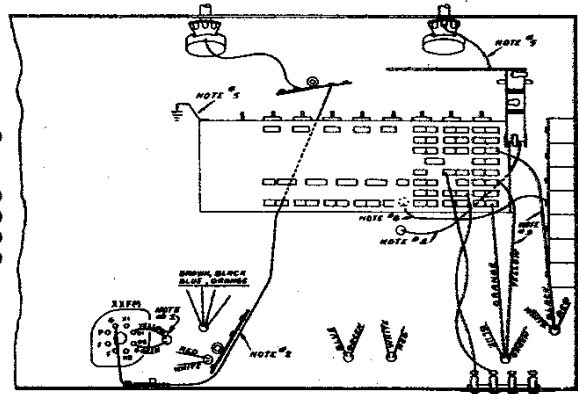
CRITICAL WIRING LOCATIONS, F. M. ALIGNING
